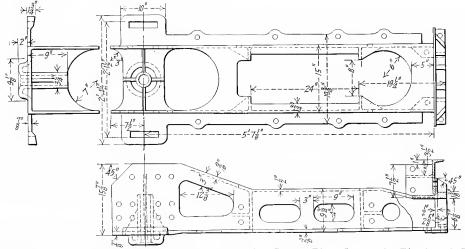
Cast Steel Draft Carrier and Striking Plate with Center Plate Integral. Pittsburgh Equipment Company.
